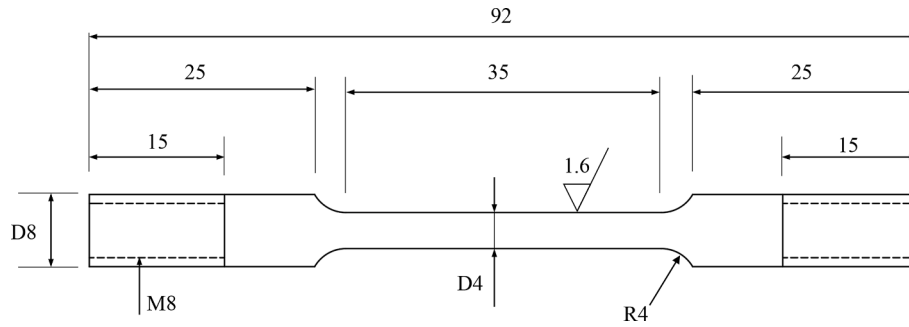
Schematic of the cylindrical specimen used in tensile tests (Dimensions in mm).
